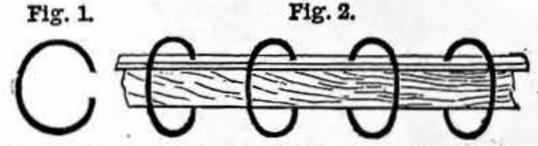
Spring. Fig. 2.—Method of using Spring.
